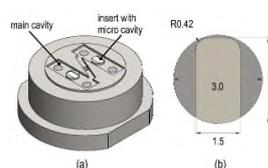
(a) Mold cavity and (b) dimensions (mm) of the mold insert
